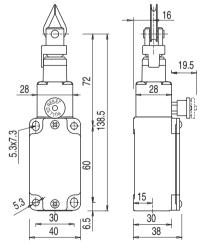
Dimensions ERS200-MxC1x-HLR in mm
